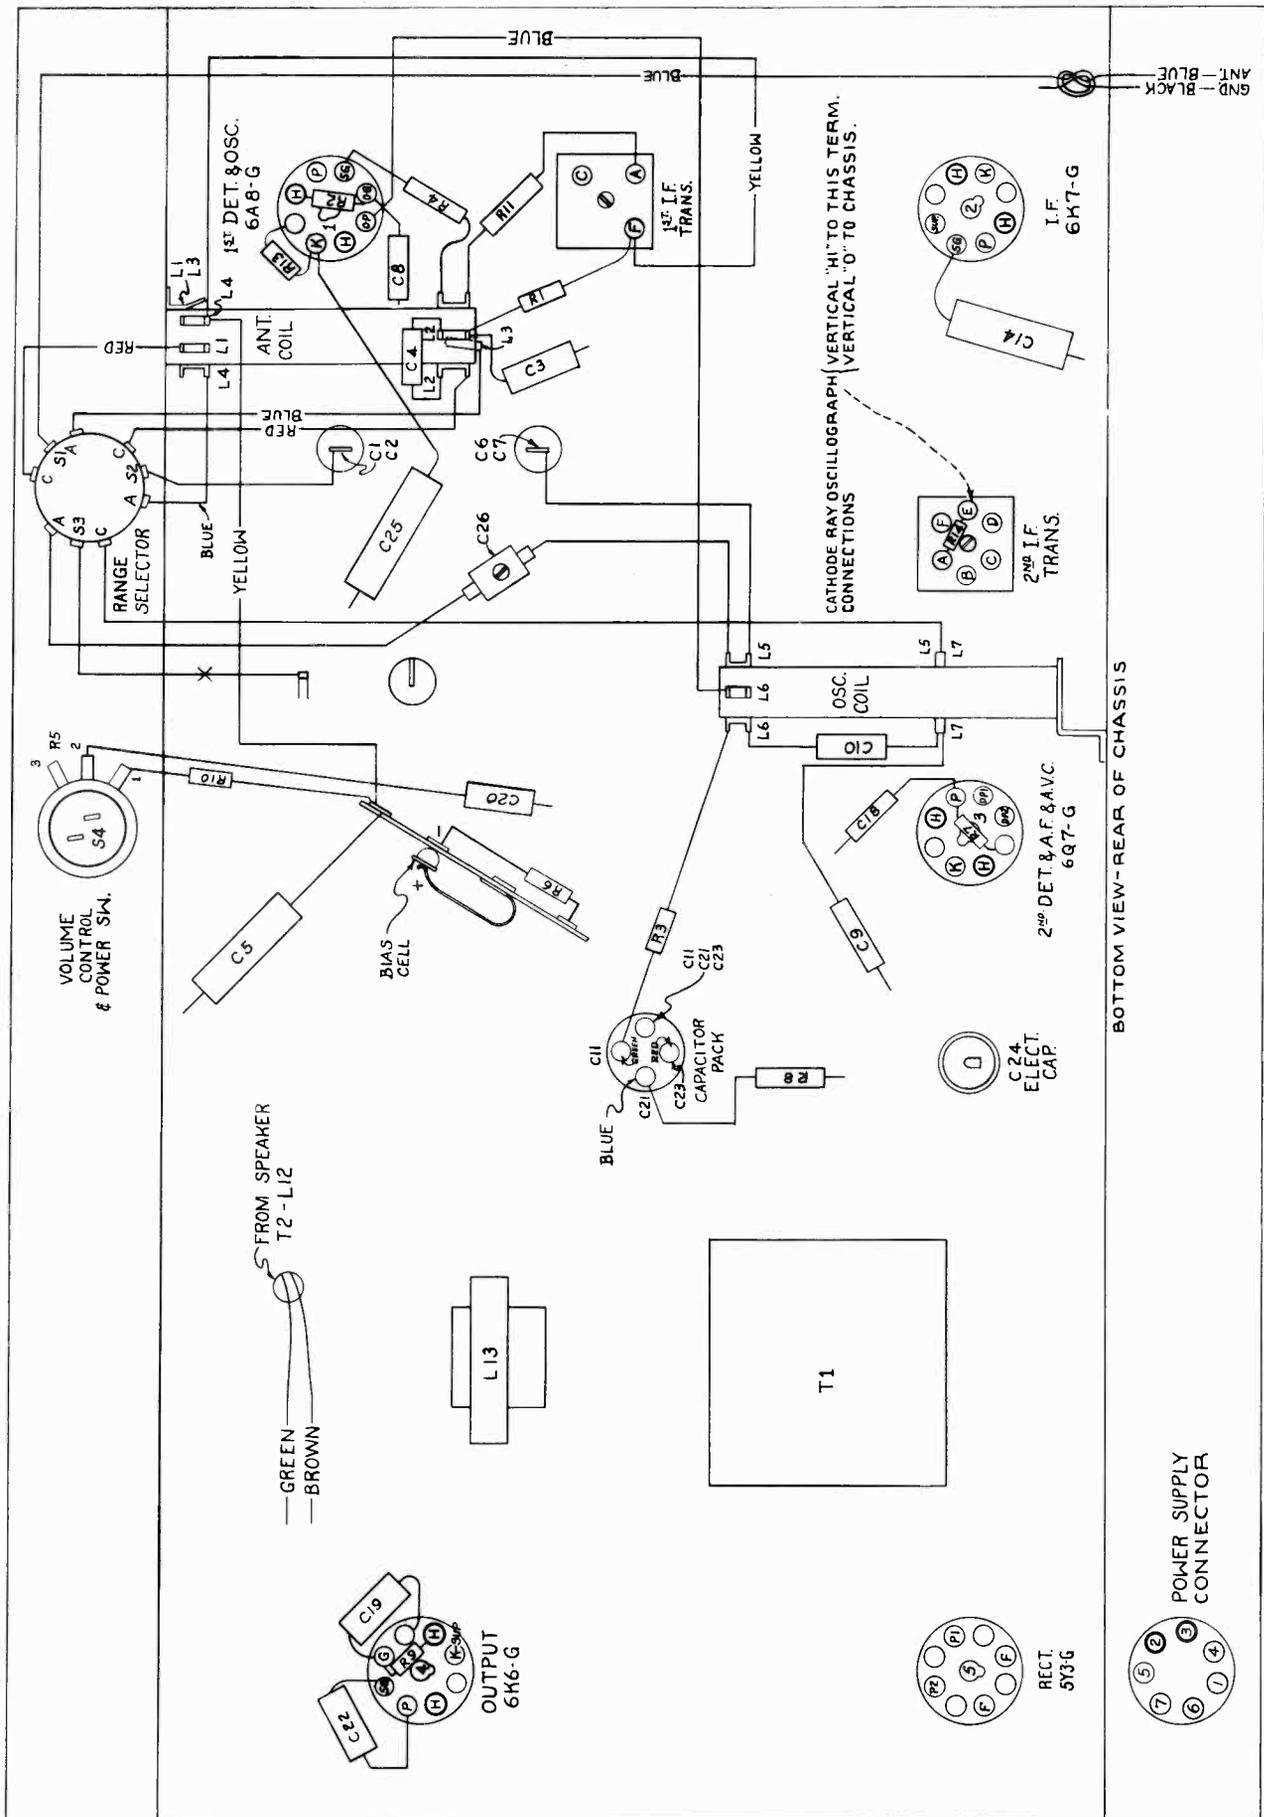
Chassis Parts Location and R-F Wiring Diagram
